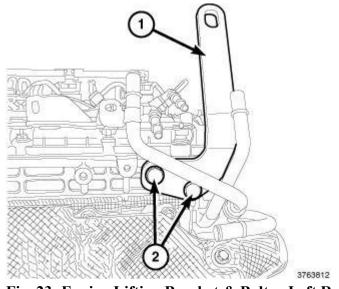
Engine Lifting Bracket & Bolts - Left Rear Courtesy of CHRYSLER GROUP, LLC
